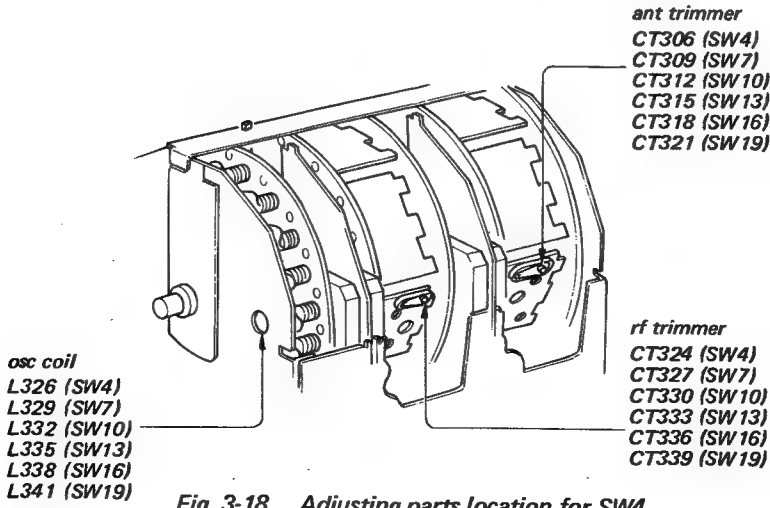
Adjusting parts location for SW4, SW7, SW10, SW13, SW16 and SW19
